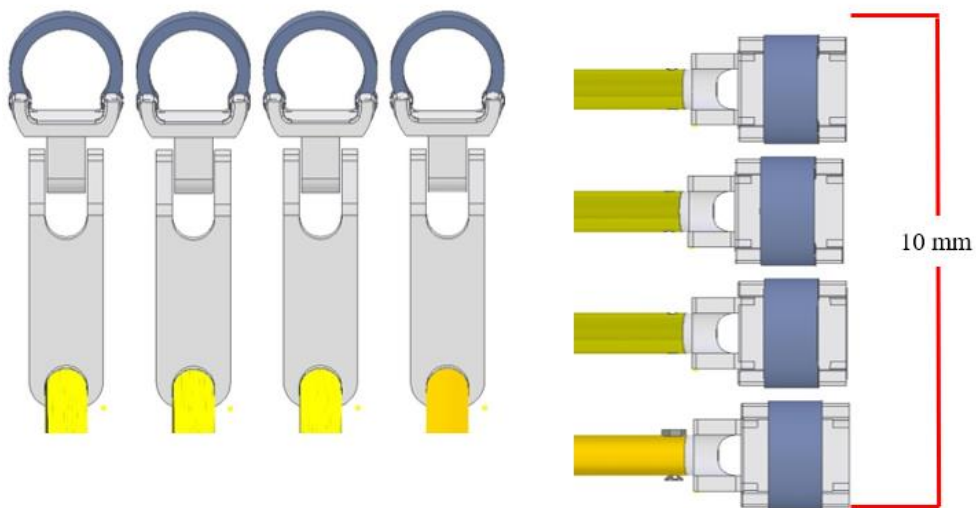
3D assembly of four fingertips holder and support that connected with the guiding shaft.
